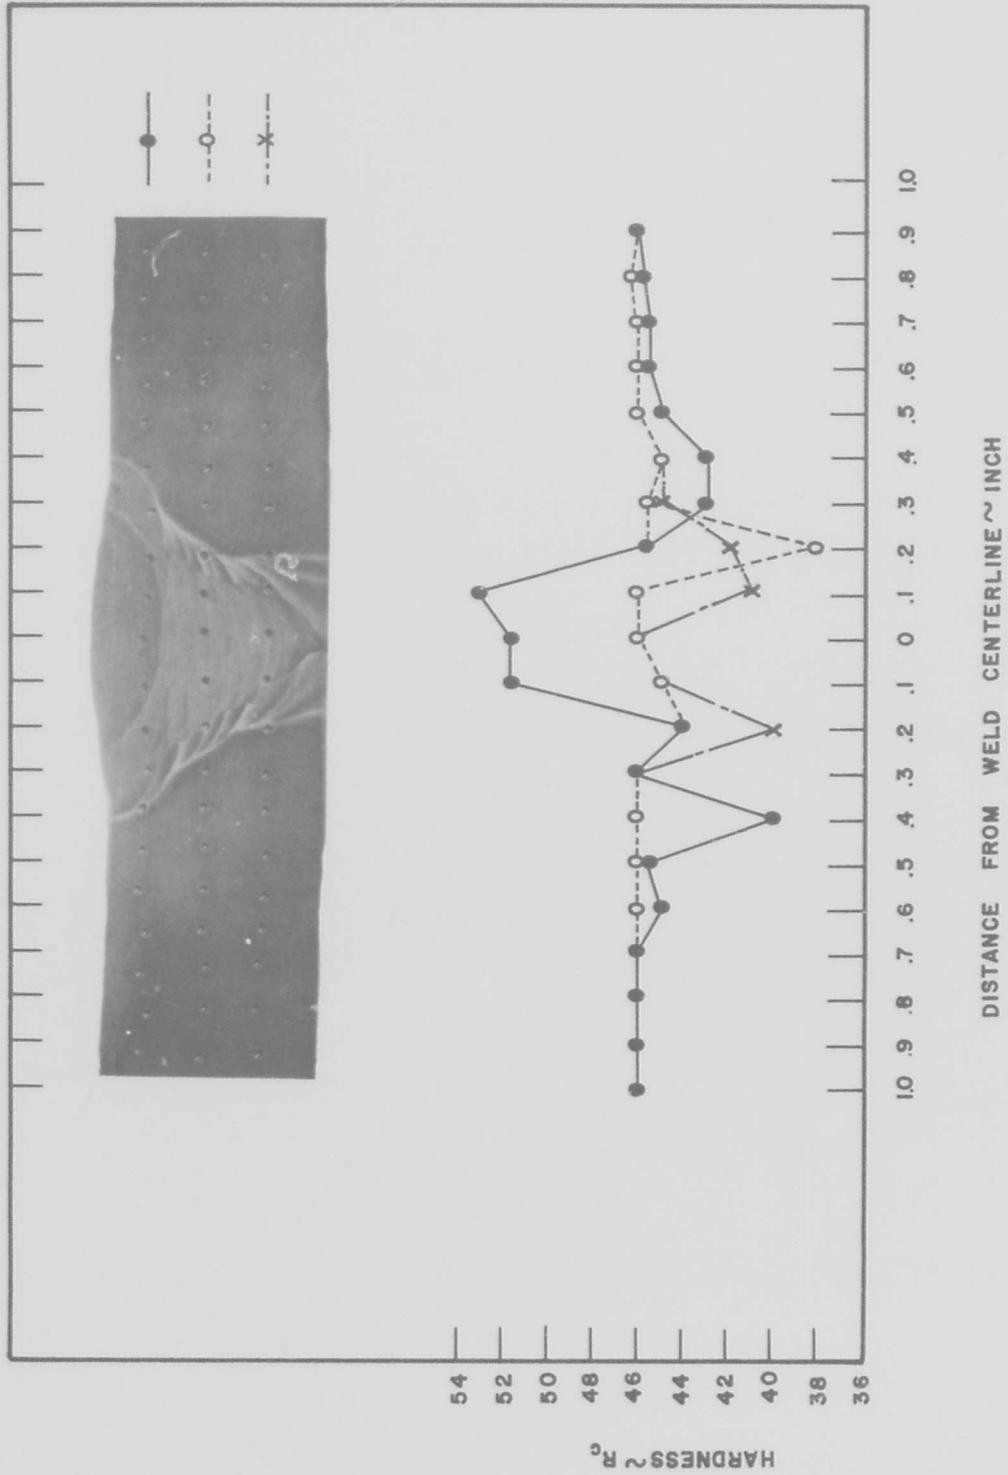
Hardness Survey of TIG Weld No. X266 Made in Vasco Jet X-2 1/2-Inch Plate at 10 ipm Using Filler Wire No. 1.
